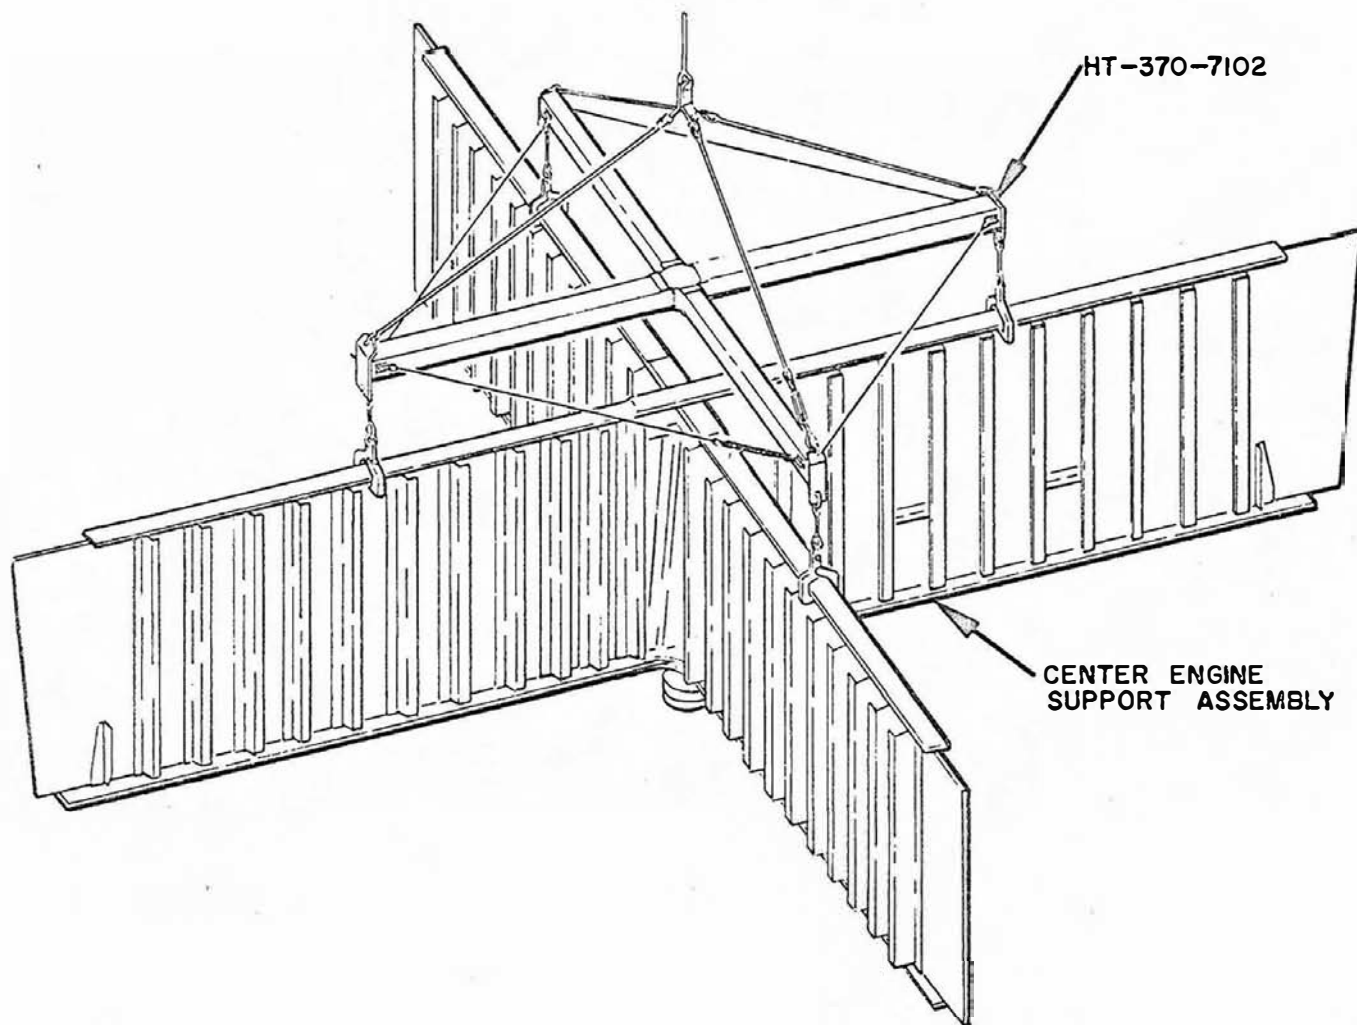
Center Engine Support Assembly Hoisting Tool HT-370-7102
